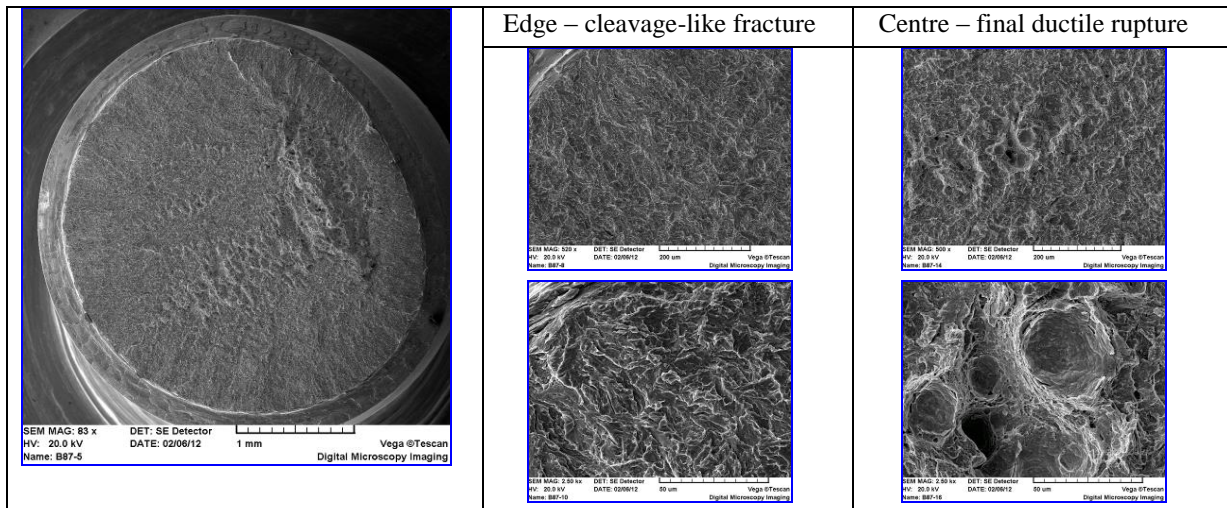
Fracture surfaces of B87 specimen tested at 350°C in lead
